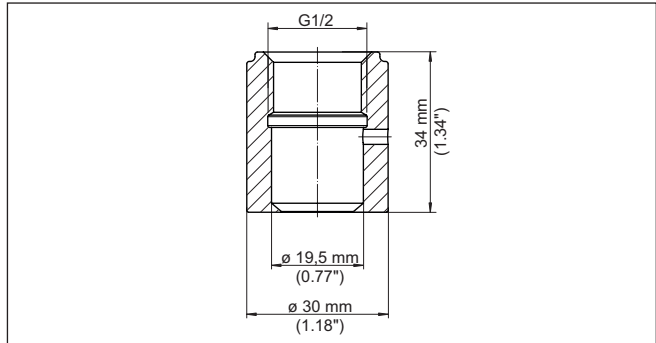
Dimensions welded socket G $\frac{1}{2}$ (ISO 228-1) - Hygienic version
